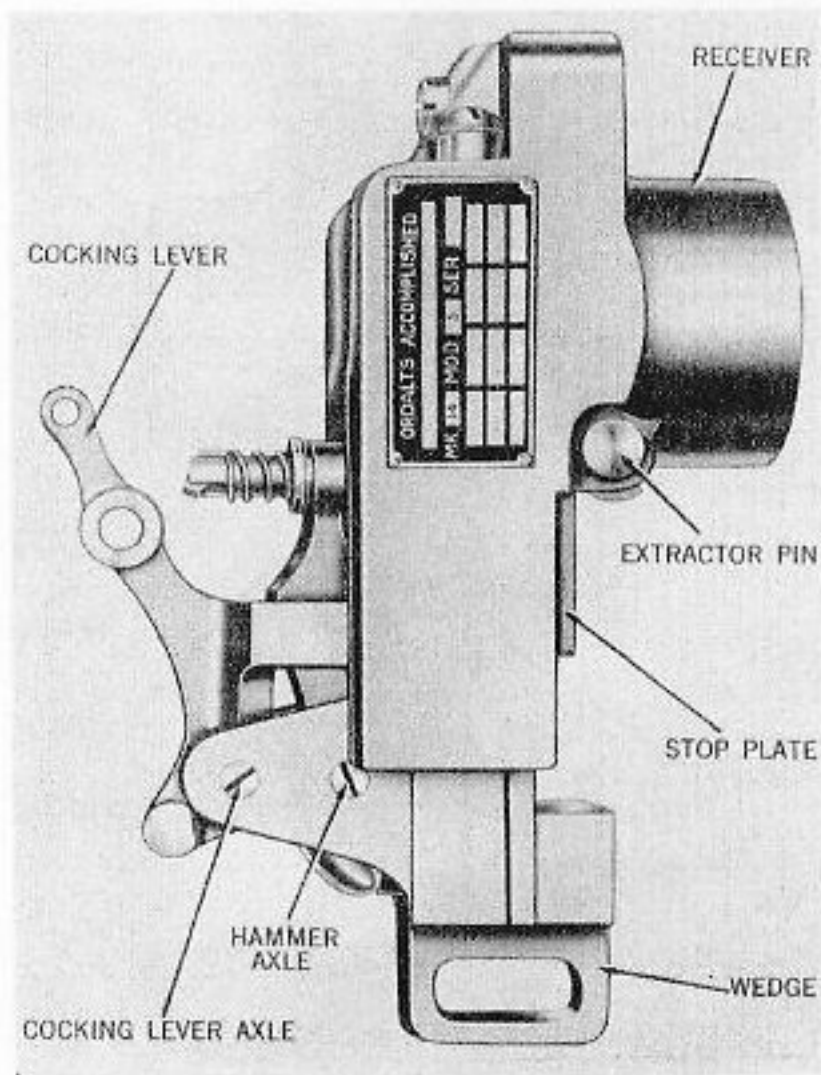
Firing Lock Mk 14 Mod 5 - Electrical Firing Position, Right Side
